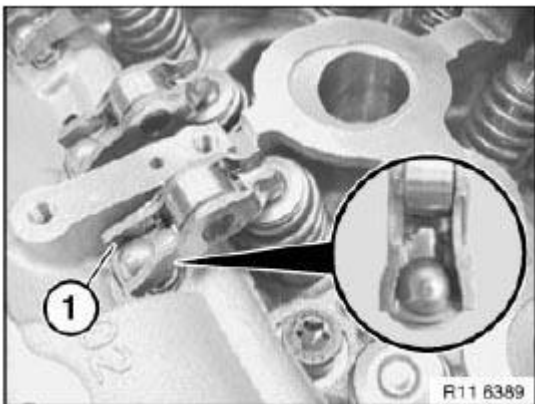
Installing Roller Cam Follower On HVCA Element And Valve
